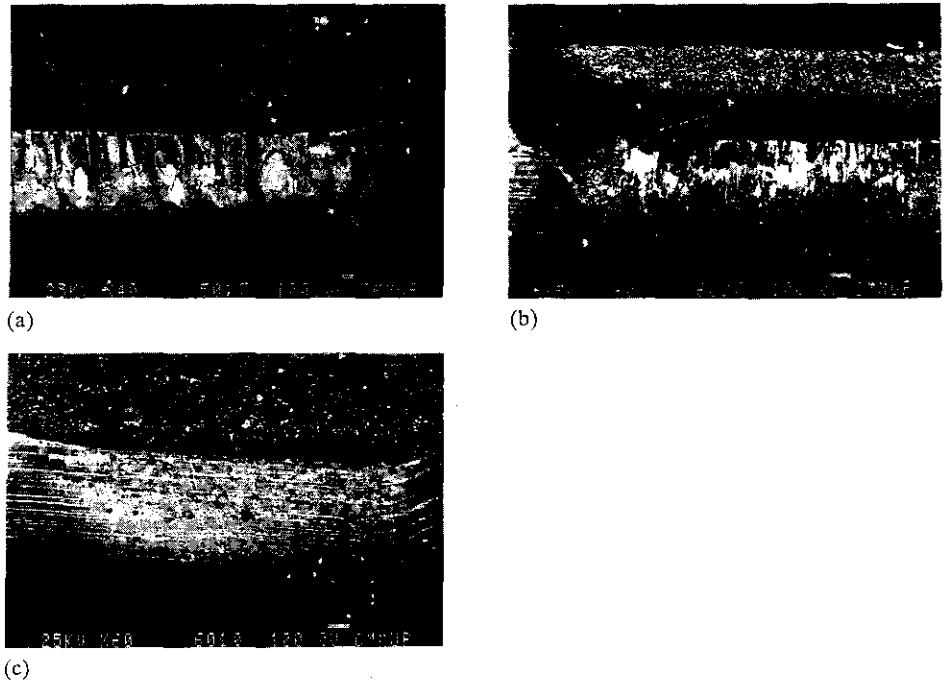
(a) View of the rake and clearance faces after tool steel machining (β - Si_3N_4 ; 3.6 m s^{-1} ; $t=15 \text{ s}$) (SEM/BS). (b) Chemically contrasted wear pattern after CeSiAlON-tool steel machining (3.9 m s^{-1} ; $t=12 \text{ s}$) (SEM/BS). (c) Wear patterns of the CeSiAlON insert after gray cast iron machining with high material removal ($M_r=1170 \times 10^{-6} \text{ m}^3$) (SEM/BS).
